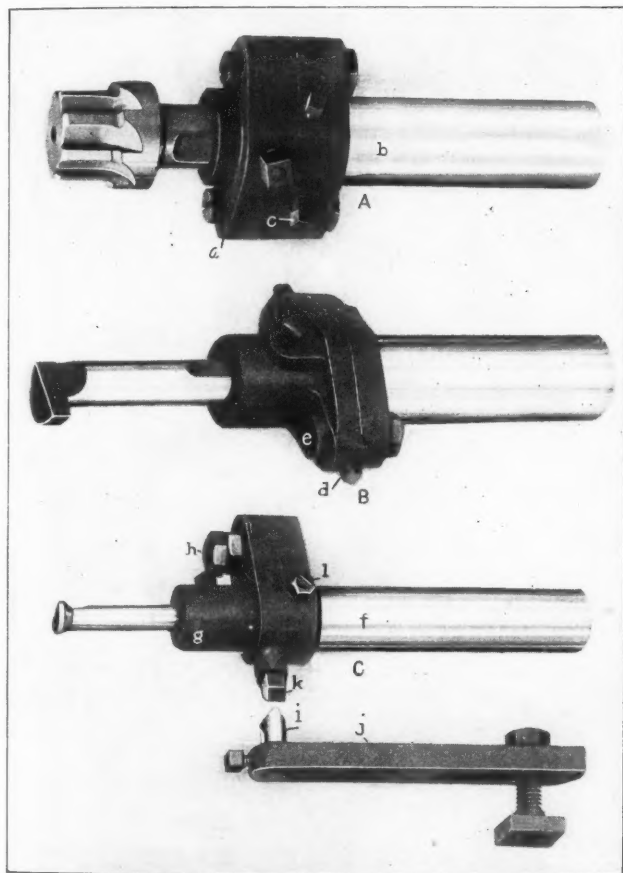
Standard Adjustable Counterbore Boring and Recessing Tool-holders
